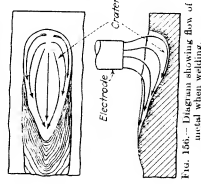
Diagram showing flow of metal when welding.
